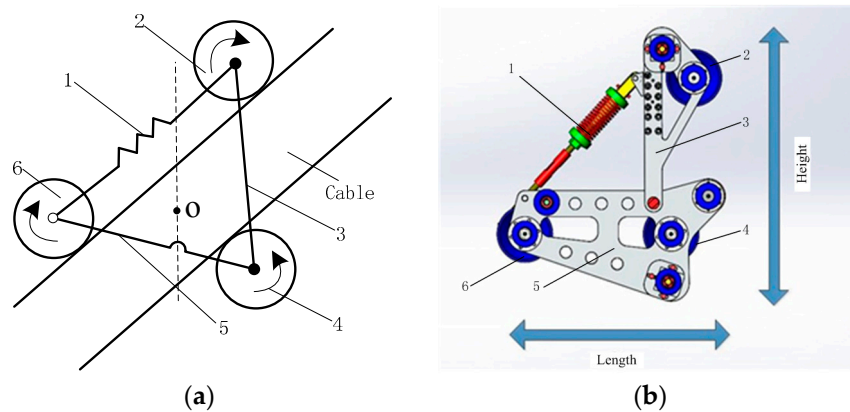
The model of climbing robot. 1—Spring mechanism; 2—Wheel B; 3—Swing plate; 4—Wheel A; 5—Support plate; 6—Wheel C. (a) The principle of the climbing robot; (b) Left view of the robot.
